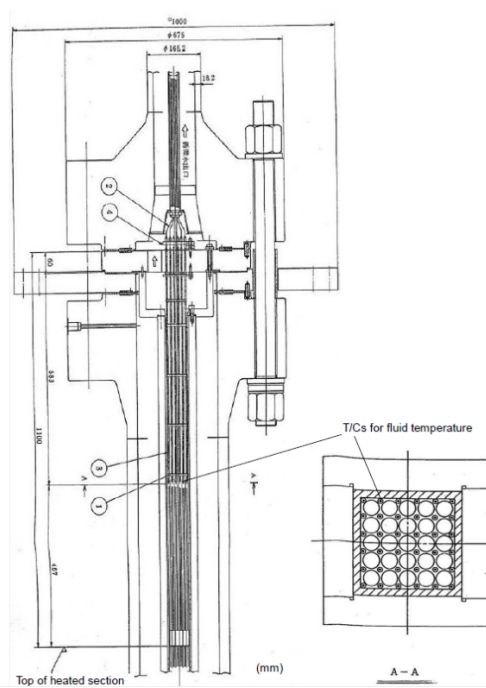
Cross-sectional View of Heater Rod
